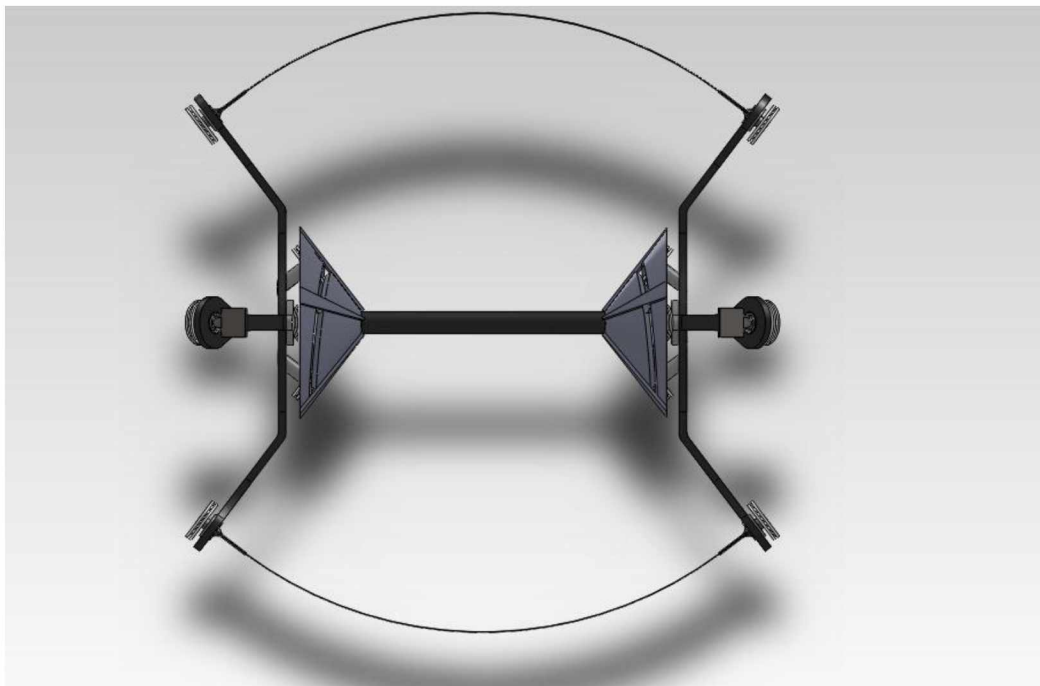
A cross-section view showing how the cyclic pitching mechanisms will be installed.
